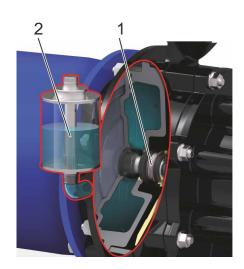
Checking the Seal Guard system (example: herborner.F-N)
